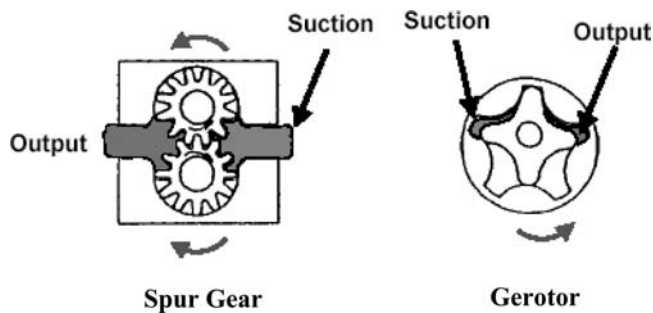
The two main types of oil pumps (spur gear pump and gerotor pump) in internal combustion engines.
